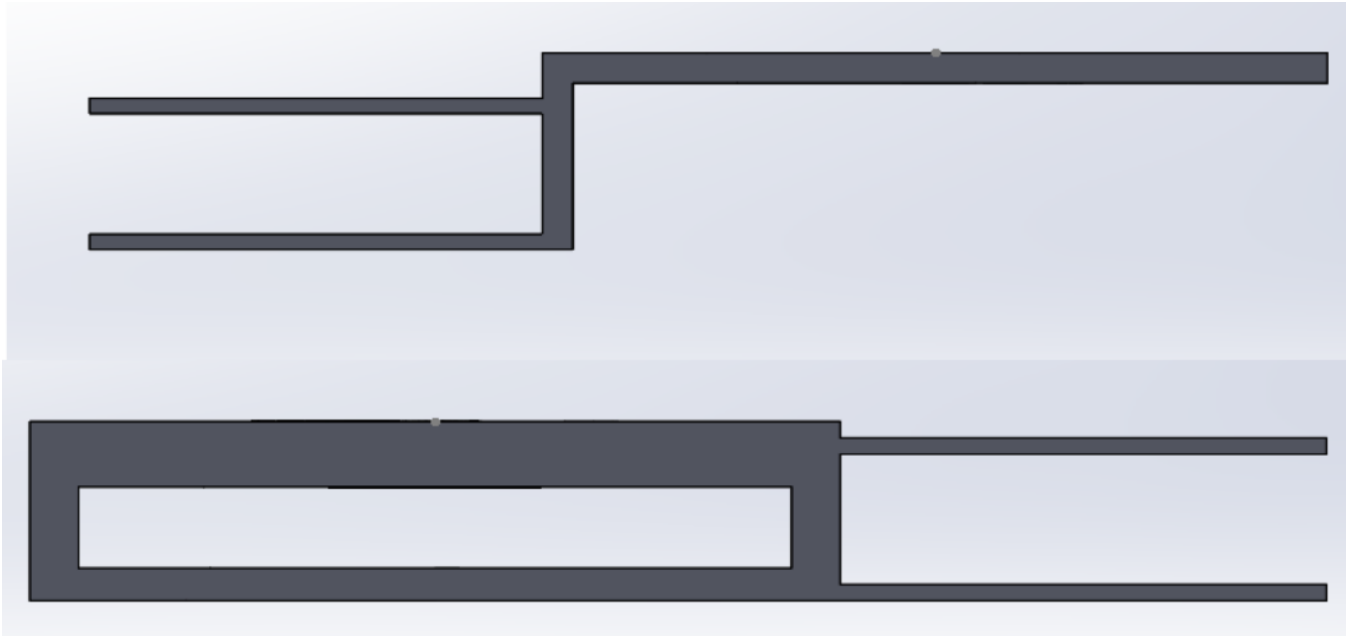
Second mounting design, top rail side view (top), bottom rail side view (bottom)
